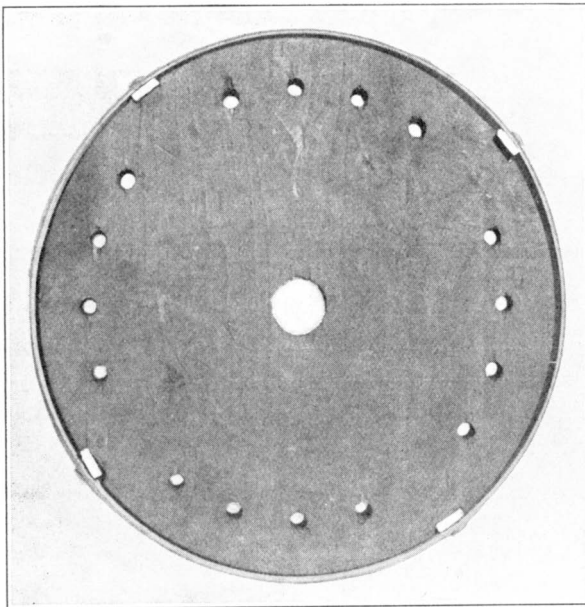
DROP WIRE POLE HEAD, SHOWING DRILLINGS FOR CLAMP SPINDLES AND FINIAL DOWEL.
